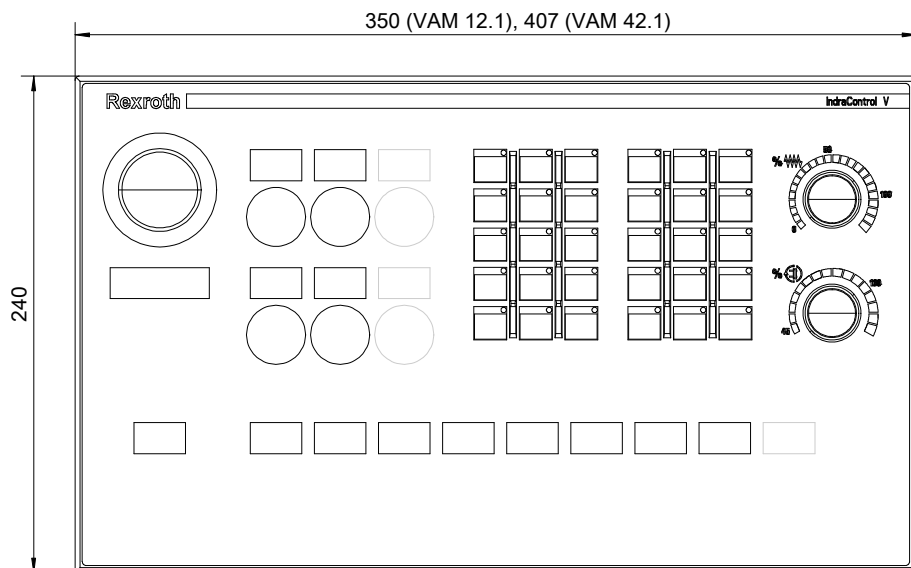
Front view of the IndraControl VAM 12.1/VAM 42.1 (in mm)
